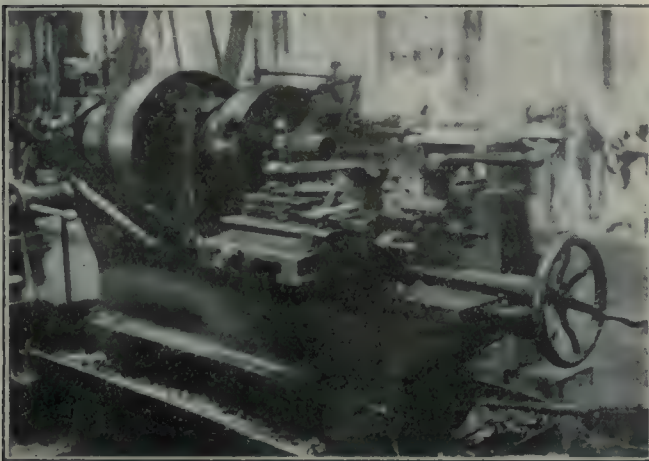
POTTER & JOHNSTON CUTTING-OFF MACHINE CUTTING OFF OPEN END OF 18-POUNDER SHELLS.
